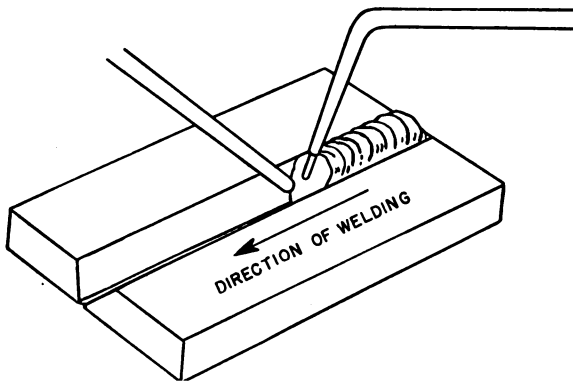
Forehand, puddle, or ripple welding.
